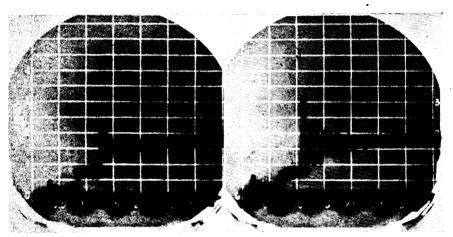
Two Hydrauliscope pictures for a casting produced by automatic ladling (left) and by hand ladling (right).
